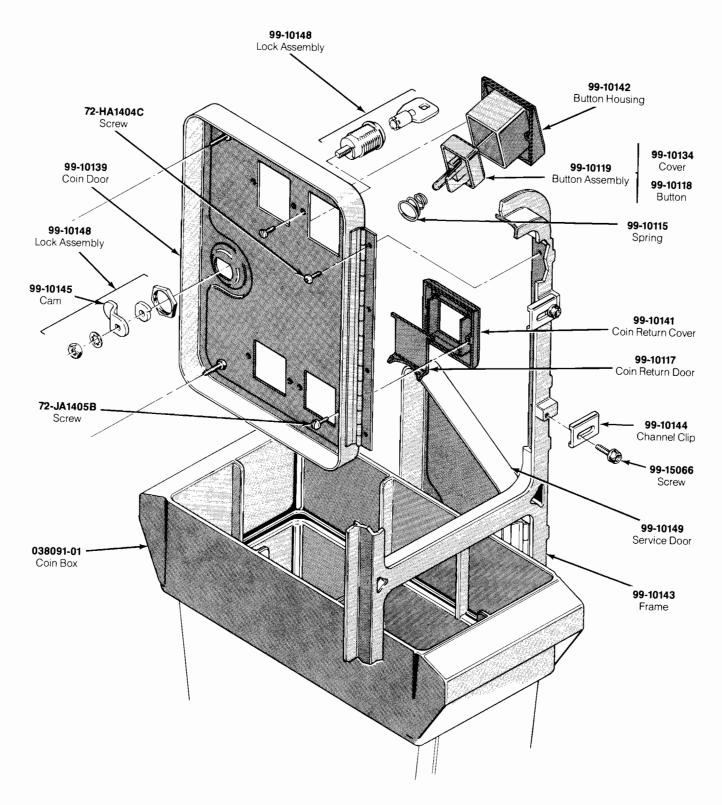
Coin Acceptors, Inc. Coin Door Assembly, continued 171027-001 A
